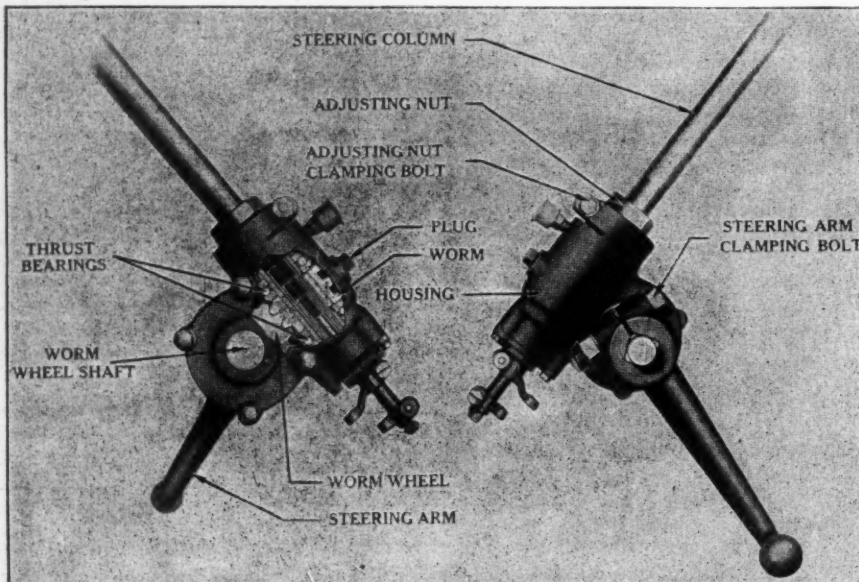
Gemmer steering gear assembly on Studebaker showing parts for adjustment
